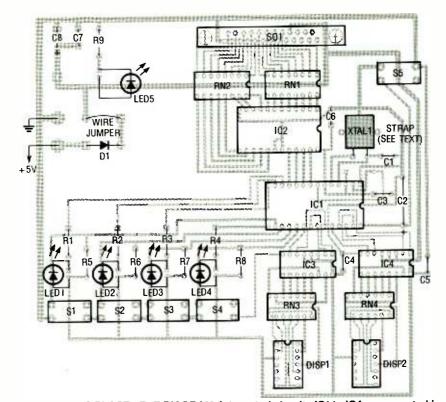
PARTS PLACEMENT DIAGRAM. Integrated circuits IC1 to IC4 are mounted in sockets. Note wire clamping crystal XTAL1 case to board. A DC jack can be mounted in a drilled hole on the board (not shown).
